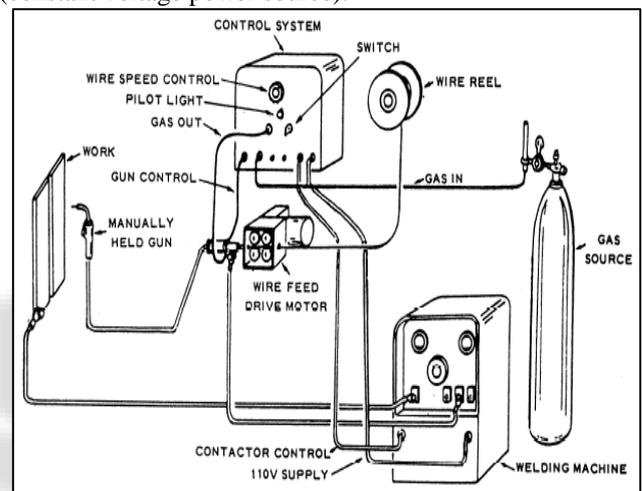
Metal Inert Gas Welding (MIG)
